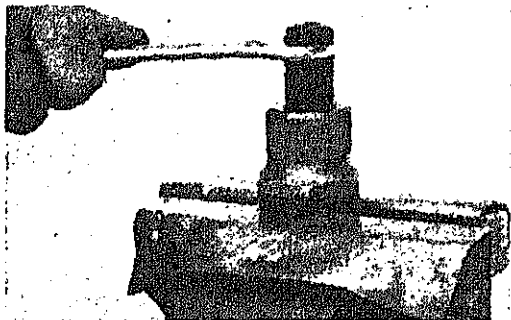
Fitting guide pin of carburettor valve by means of tool 9201 0364.
